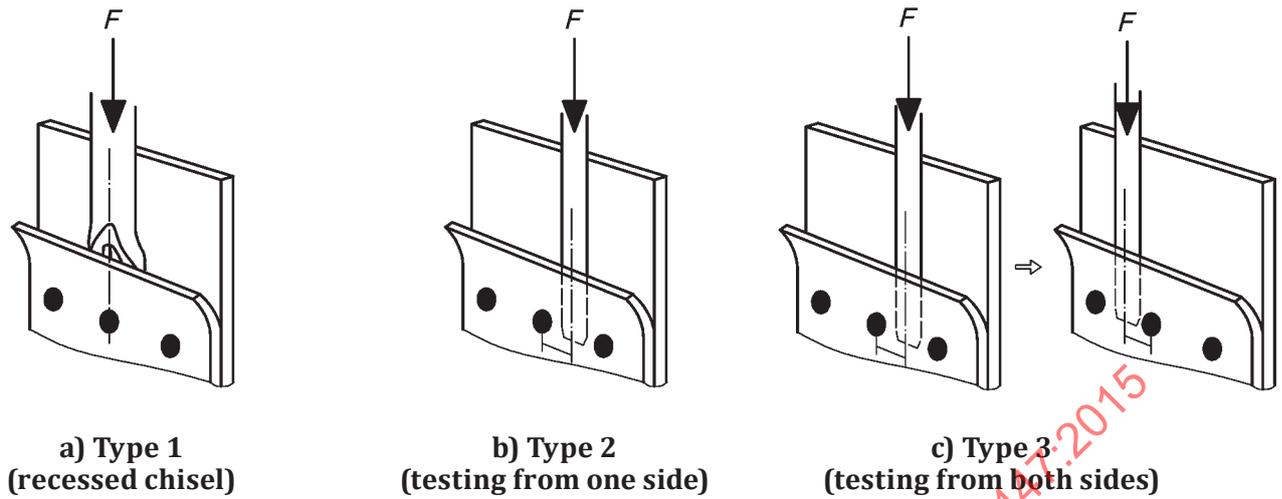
Chisel testing of resistance spot and protection welded joints
